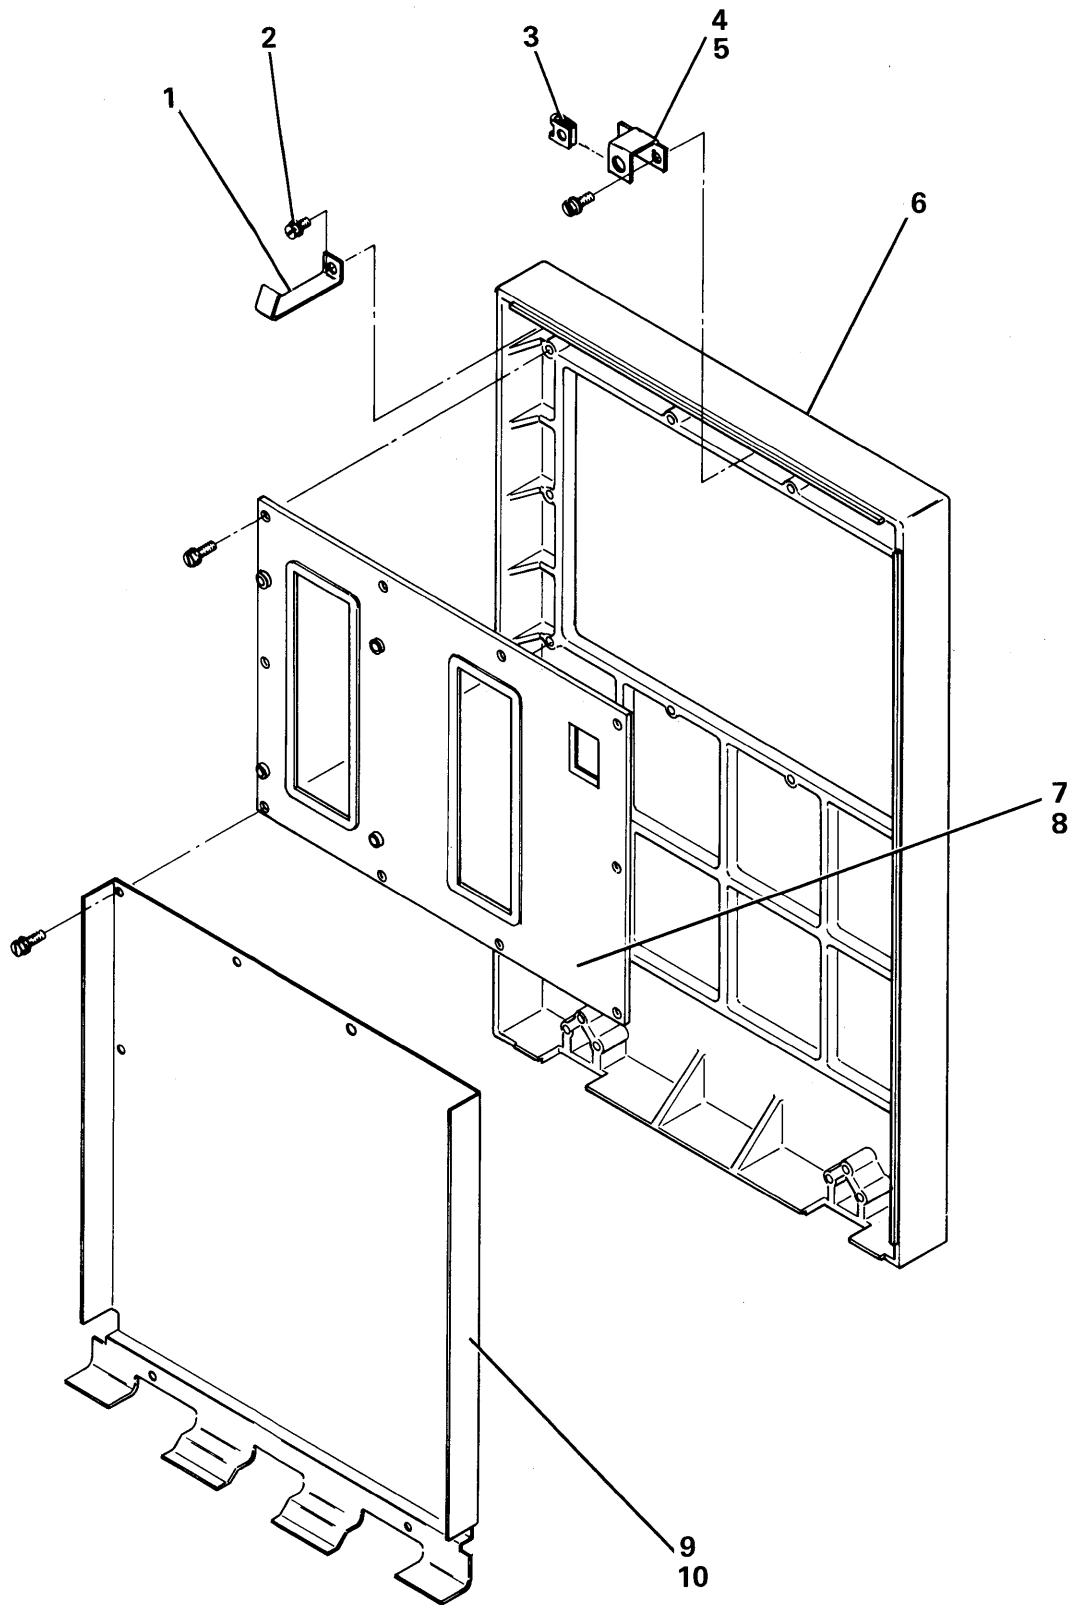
A. FRONT DOOR ASSEMBLY. SEE LIST 2A.
